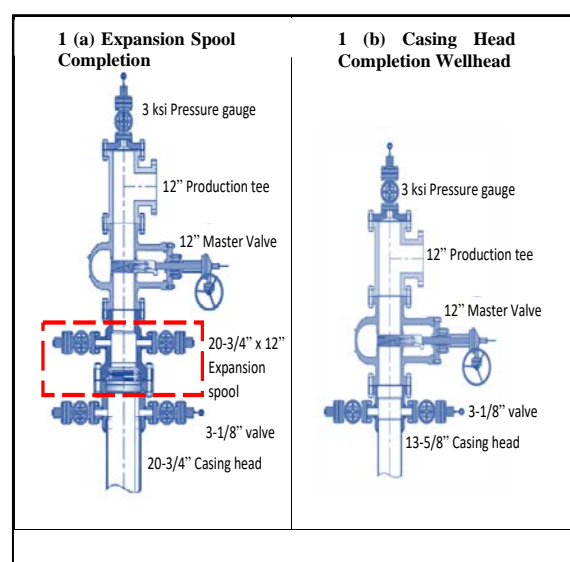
(a) Expansion Spool Completion and (b) Casing Head Completion Wellhead.
